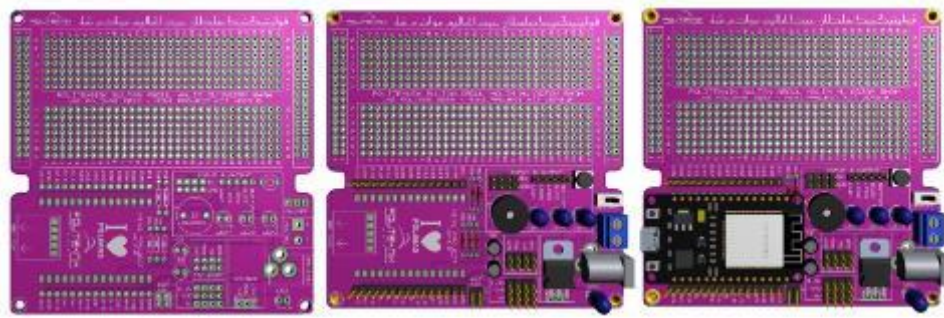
Front and Back view of the Mini Project Kit PCB Board
